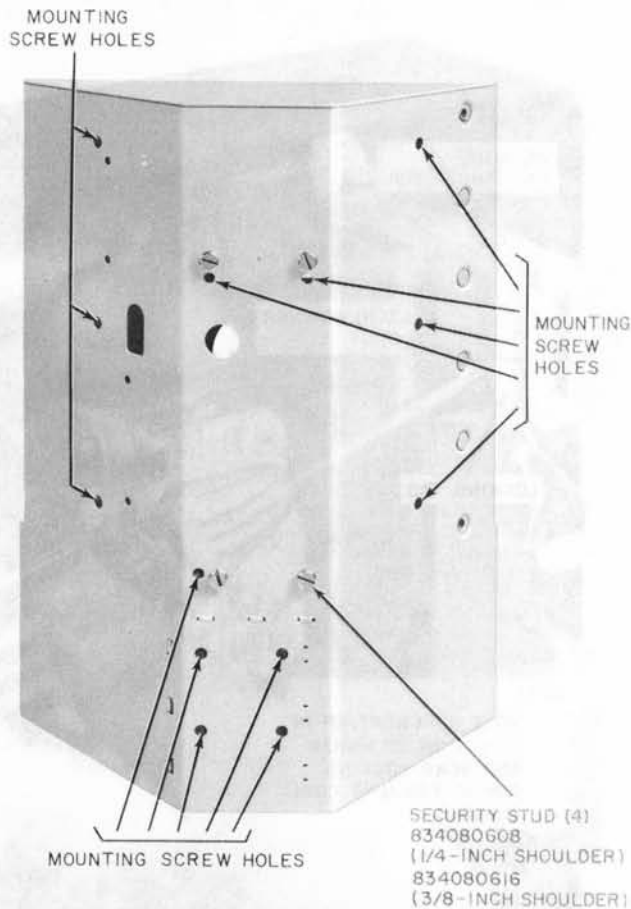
Location of Mounting Screw Holes and Security Studs in 2-Type Set
